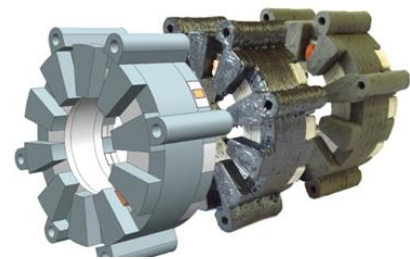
Stator of a winding headless reluctance machine. Left: CAD model, center: sintered stator, right: printed part before heat treatment ¹
